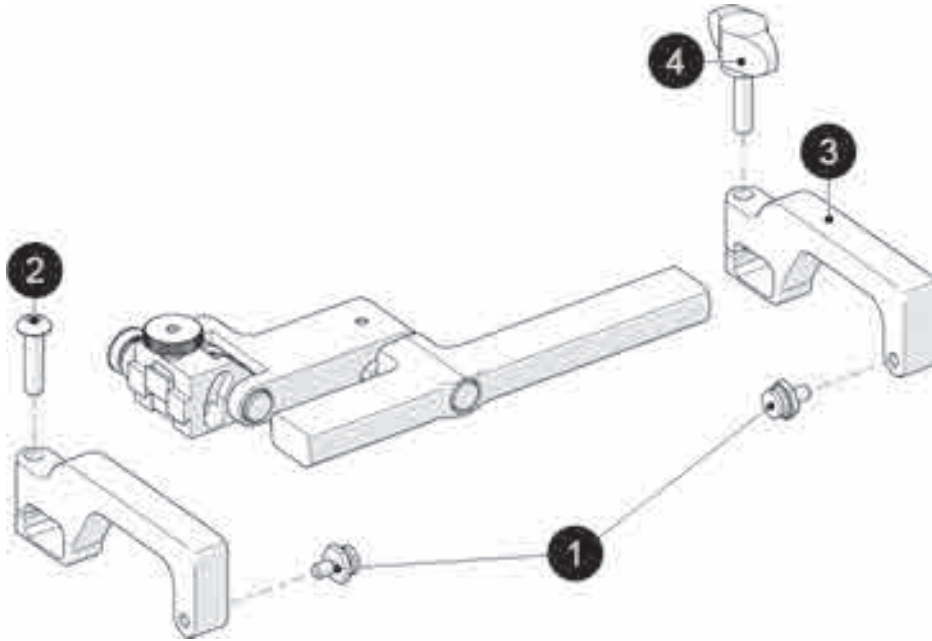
Pivoting HydroFORM probe holder (P/N: U8775328)
